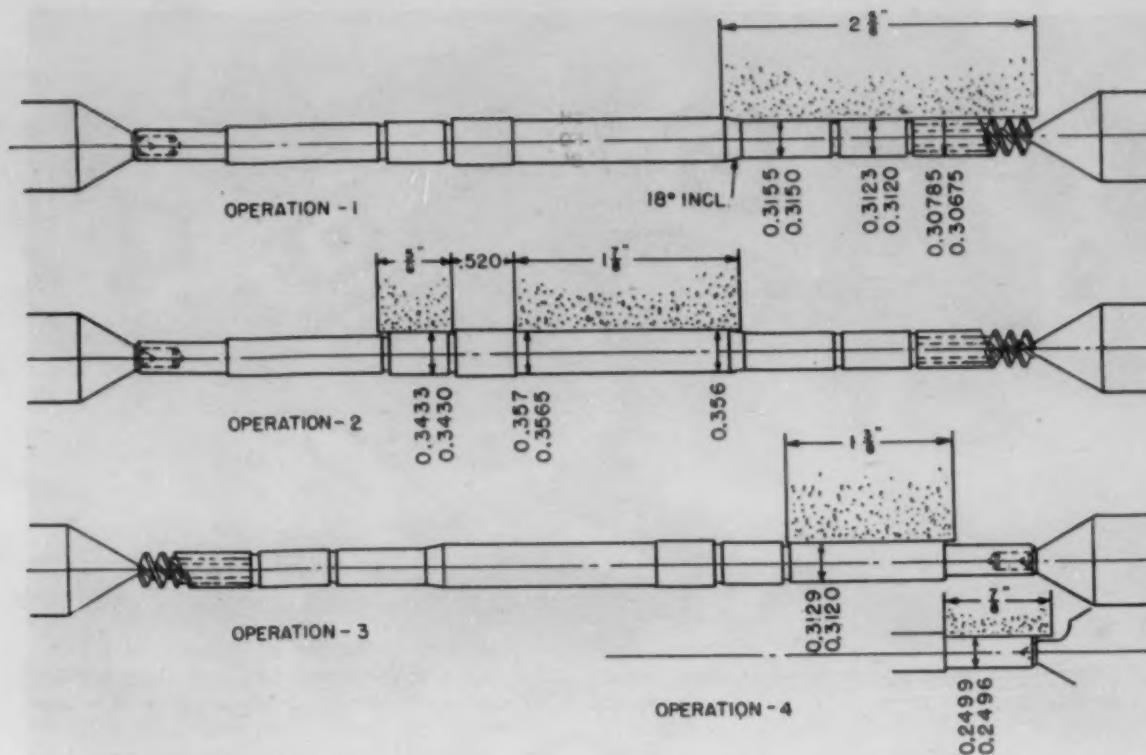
A series of plain grinding operations performed on a 4 x 12 in. cylindrical grinder. (Courtesy: Landis Tool Co.)
